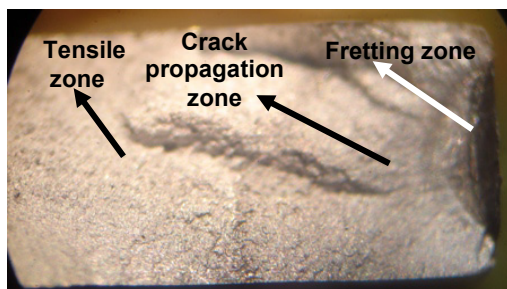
Fracture surface of a specimen after failure by fretting fatigue [3].
